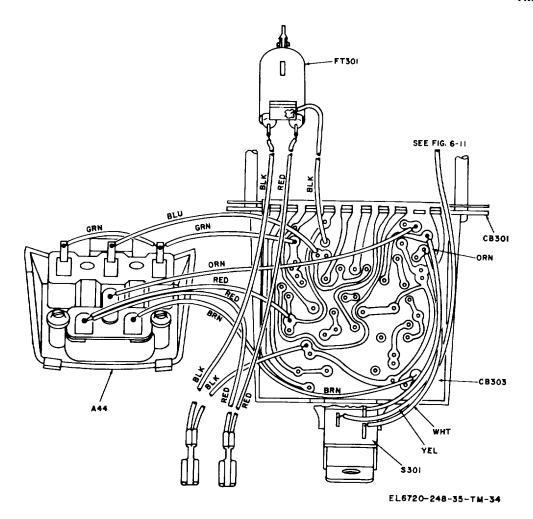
Model 700 strobe assembly, wiring diagram.
